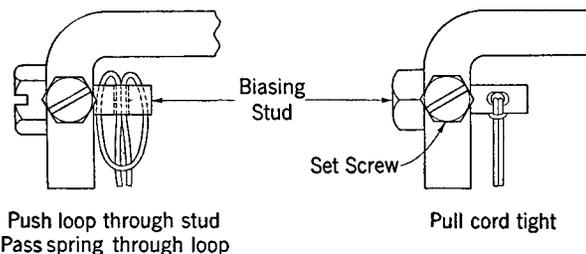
Attaching Biasing Springs on 392-Type Loud Ringing Bells
